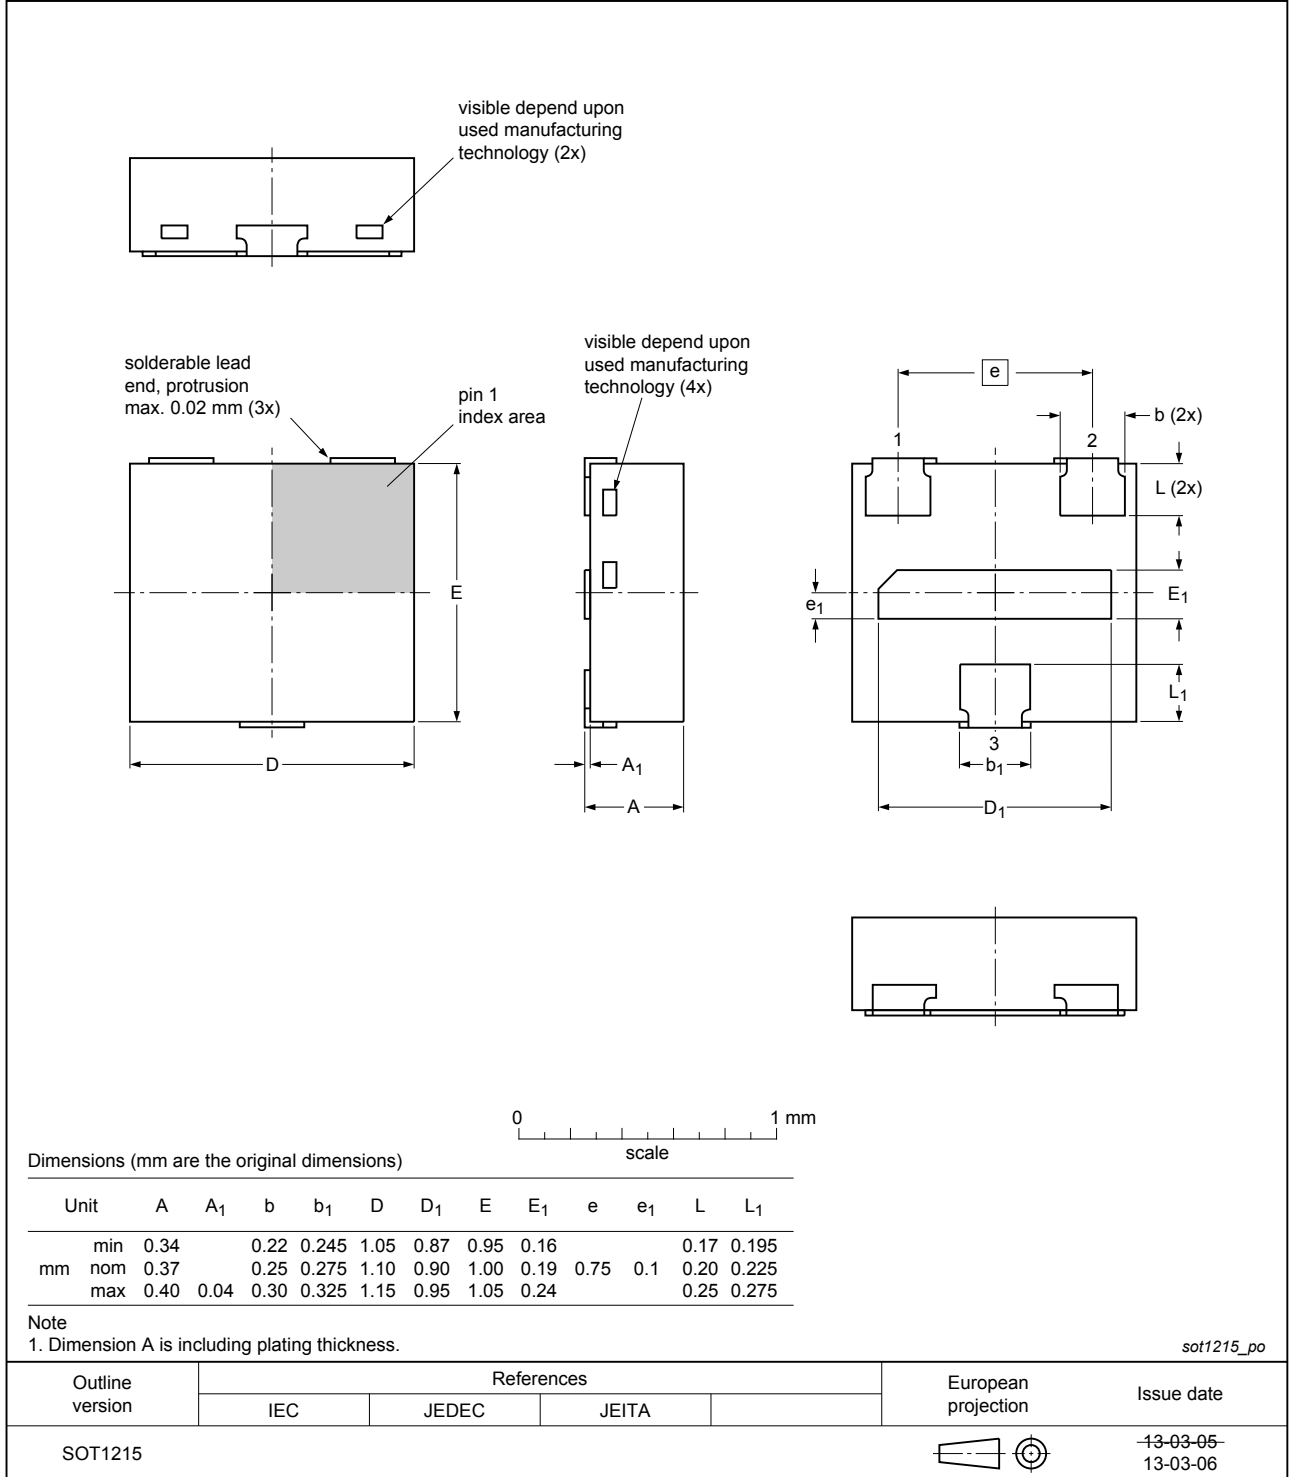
Package outline DFN1010D-3 (SOT1215)
